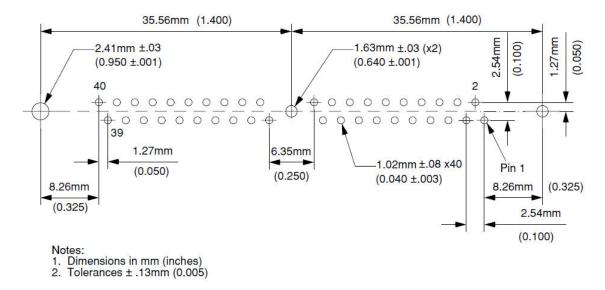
RTR-10 Recommended PCB Hole Pattern (Component Side, Vertical Mounting)
